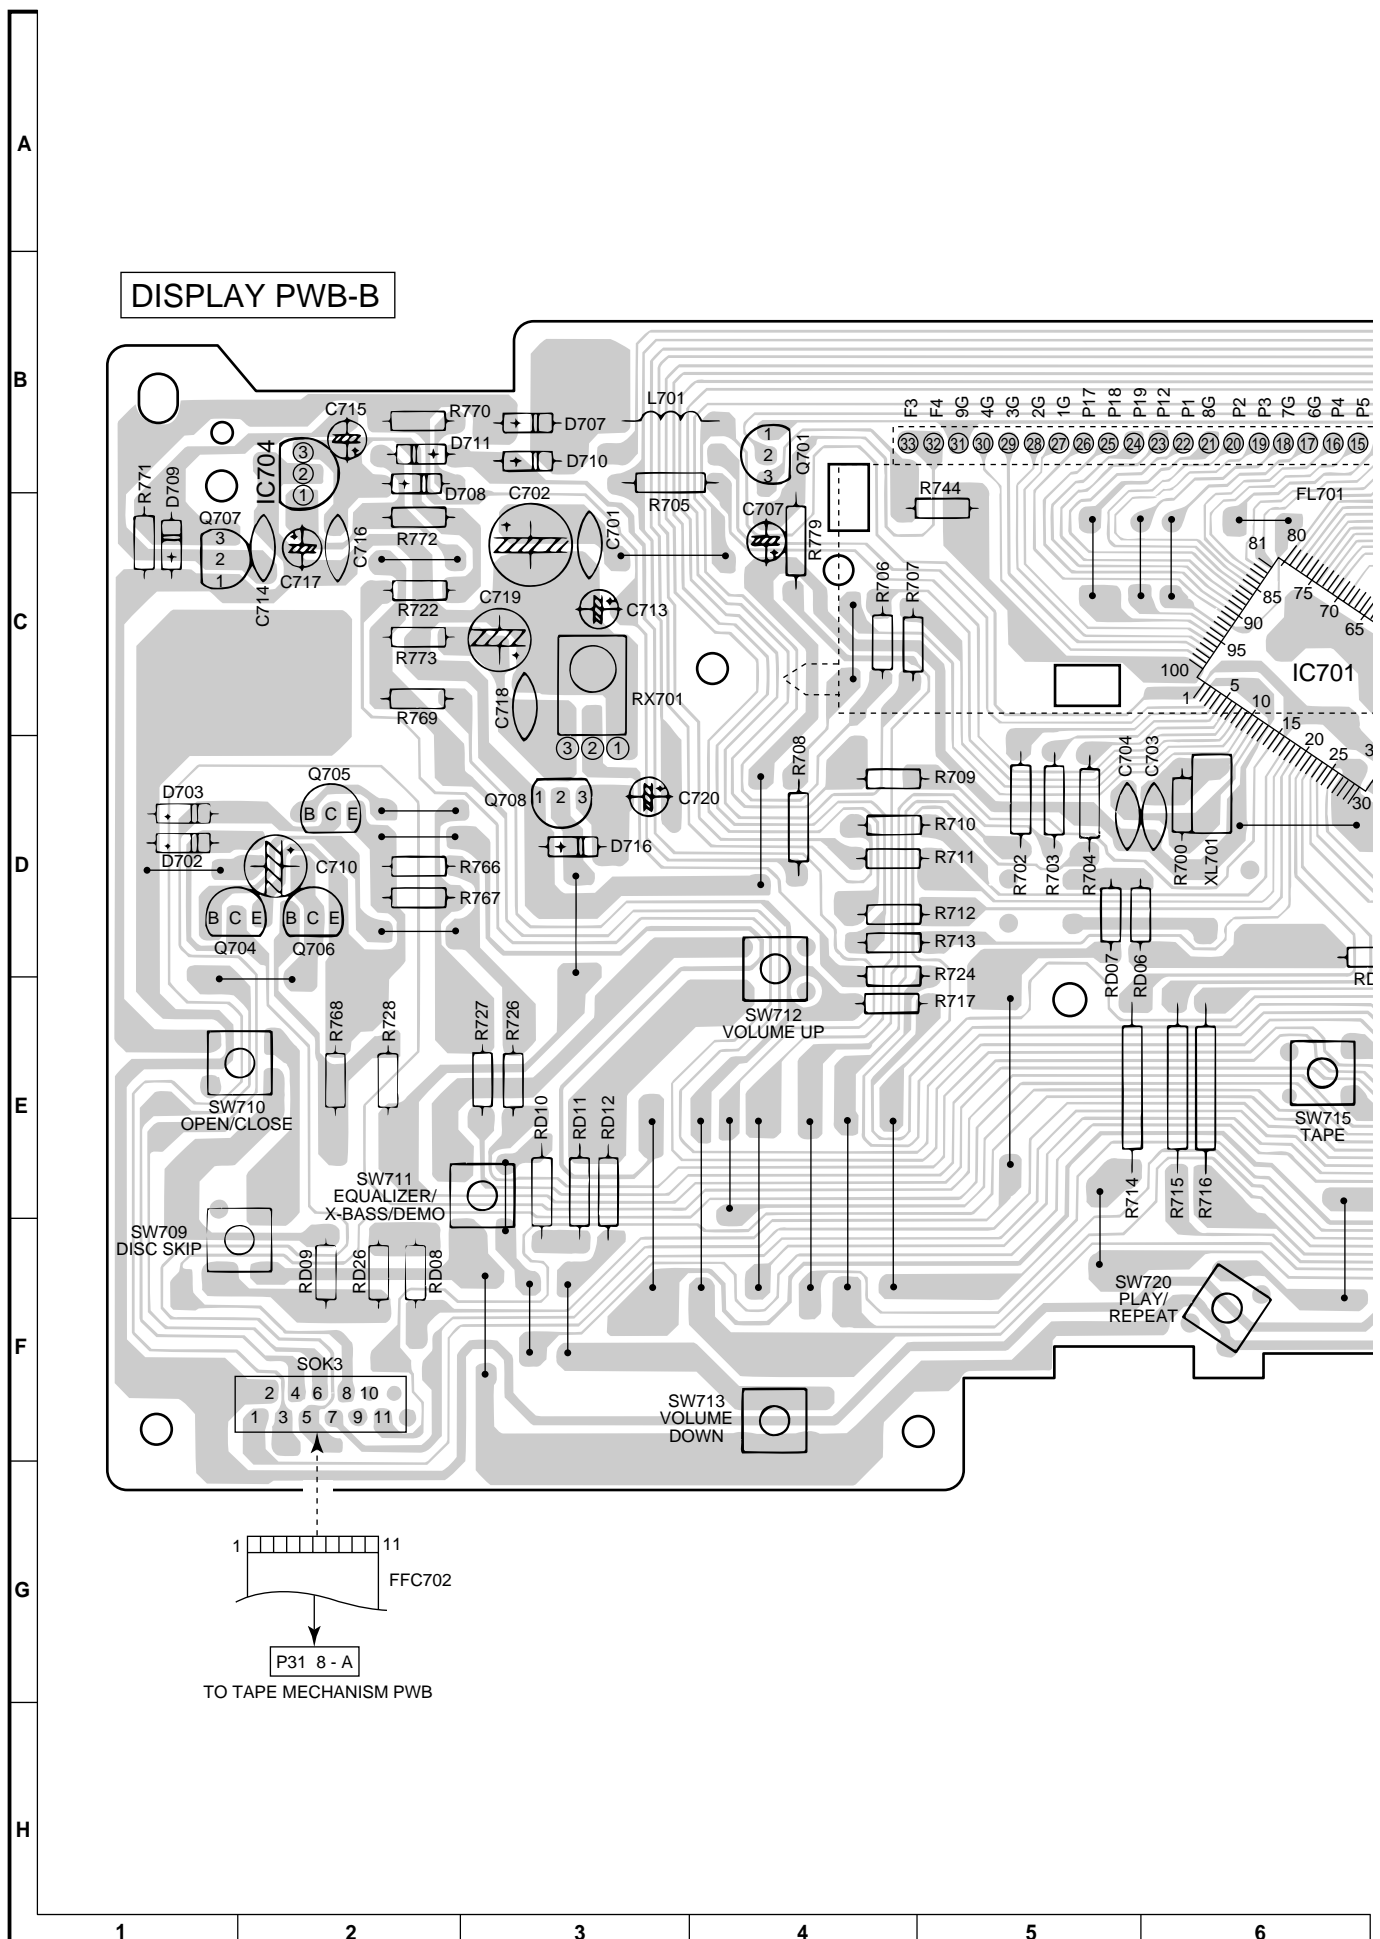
WIRING SIDE OF P.W.BOARD (3/6)
